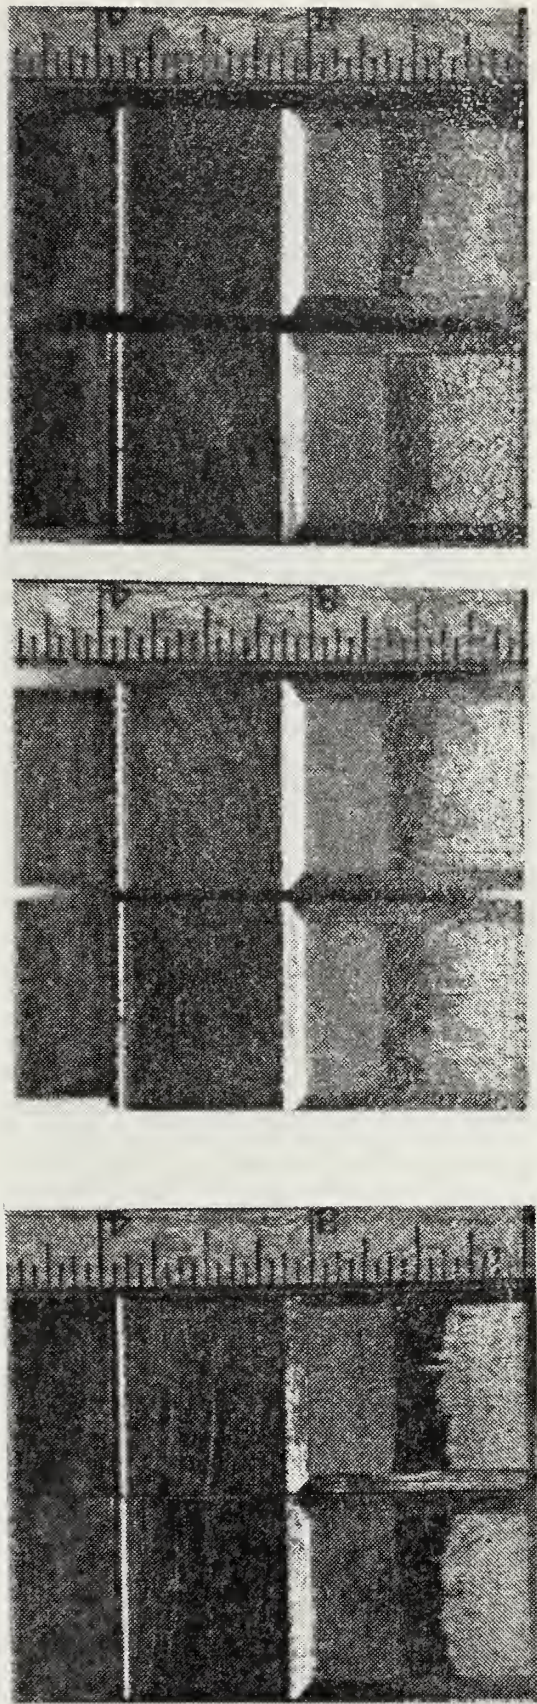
HY-100 Fracture Surfaces at 1.05X
